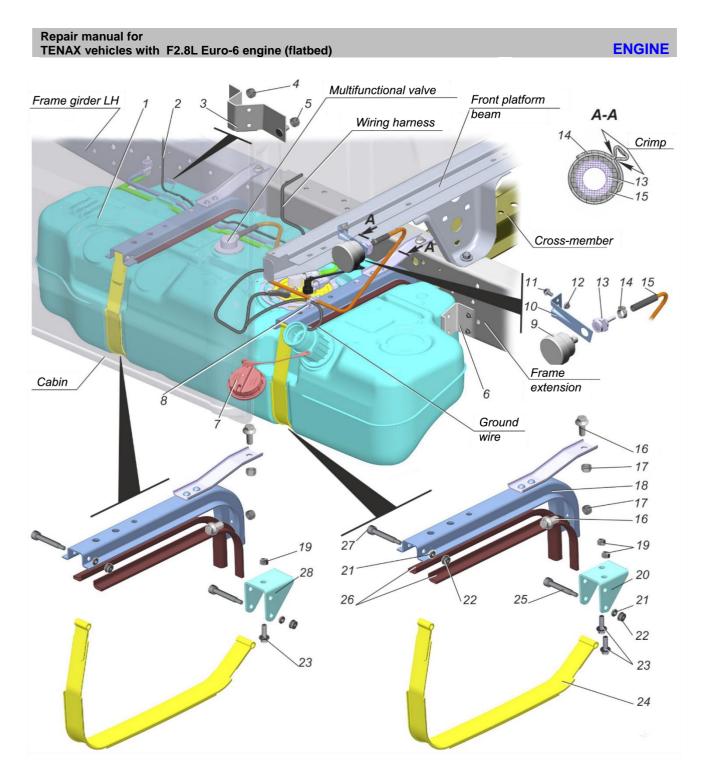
Fuel tank installation to flatbed vehicle with seven-seat cab: 1- fuel tank with fuel intake module; 2 -starting preheater fuel line ¹); 3, 6 - stops; 4, 5, 12, 17, 19, 22 - nuts; 7 - fuel tank plug; 8 - clip; 9 - air filter; 10 - bracket; 11, 16, 23 - bolts; 13 - air filter nut; 14 - clamp; 15 - vent line complete with hoses; 18 - fuel tank bracket; 20, 28 - clampbrackets; 21 - washers; 24 - fuel tank clamp; 25, 27 - special screws; 26 - shells
